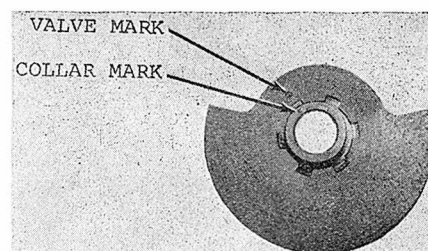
On later type rotary valve, the mark on the splined collar must be aligned with mark on valve.
